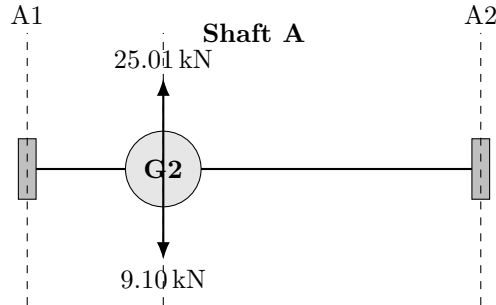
Shaft A layout, A1 & A2 are bearings.
